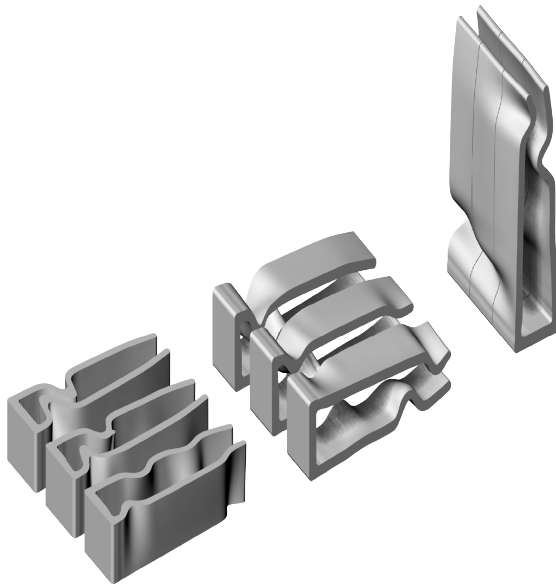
Will DeLisle and Daniel Knoll - Fabrication / Assembly Diagram
